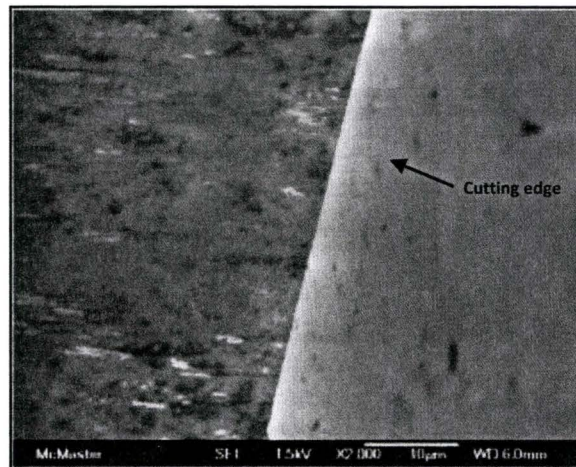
SEM image of tool used for cutting aluminum (after 5.42km)
